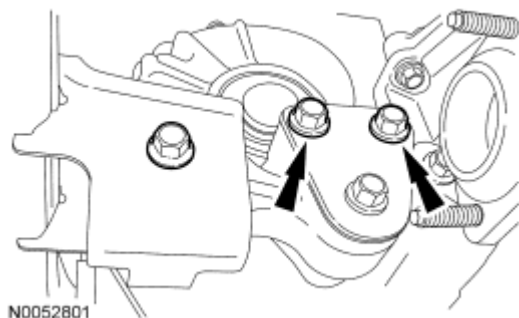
Locating Engine Roll Restrictor Bracket Bolts
